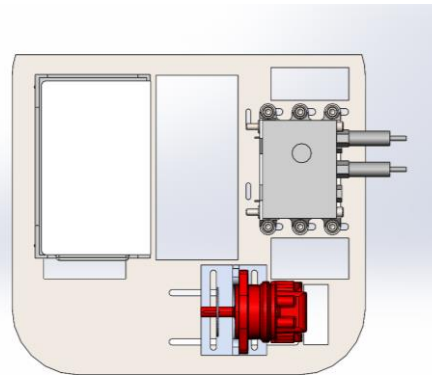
Bottom Mounting Plate Assembly. SolidWorks 2020.
